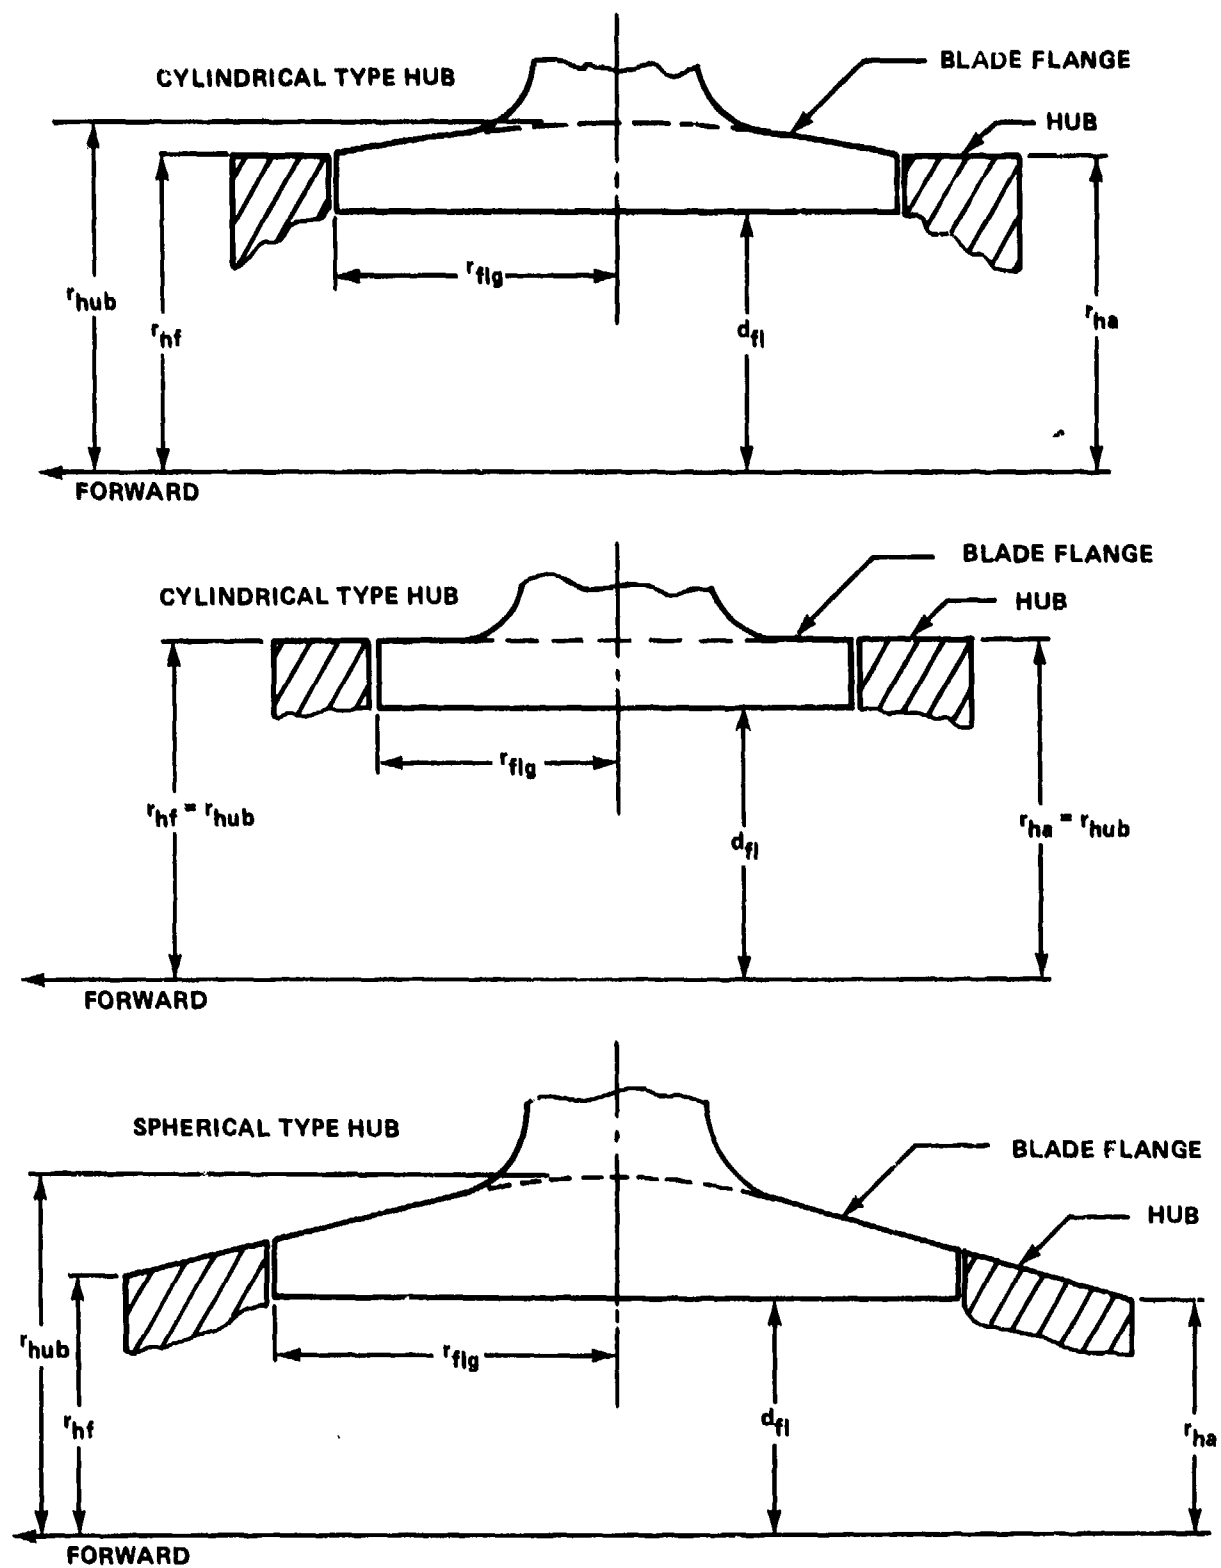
Dimensions Used in Table 2 for Hub and Blade Flange
